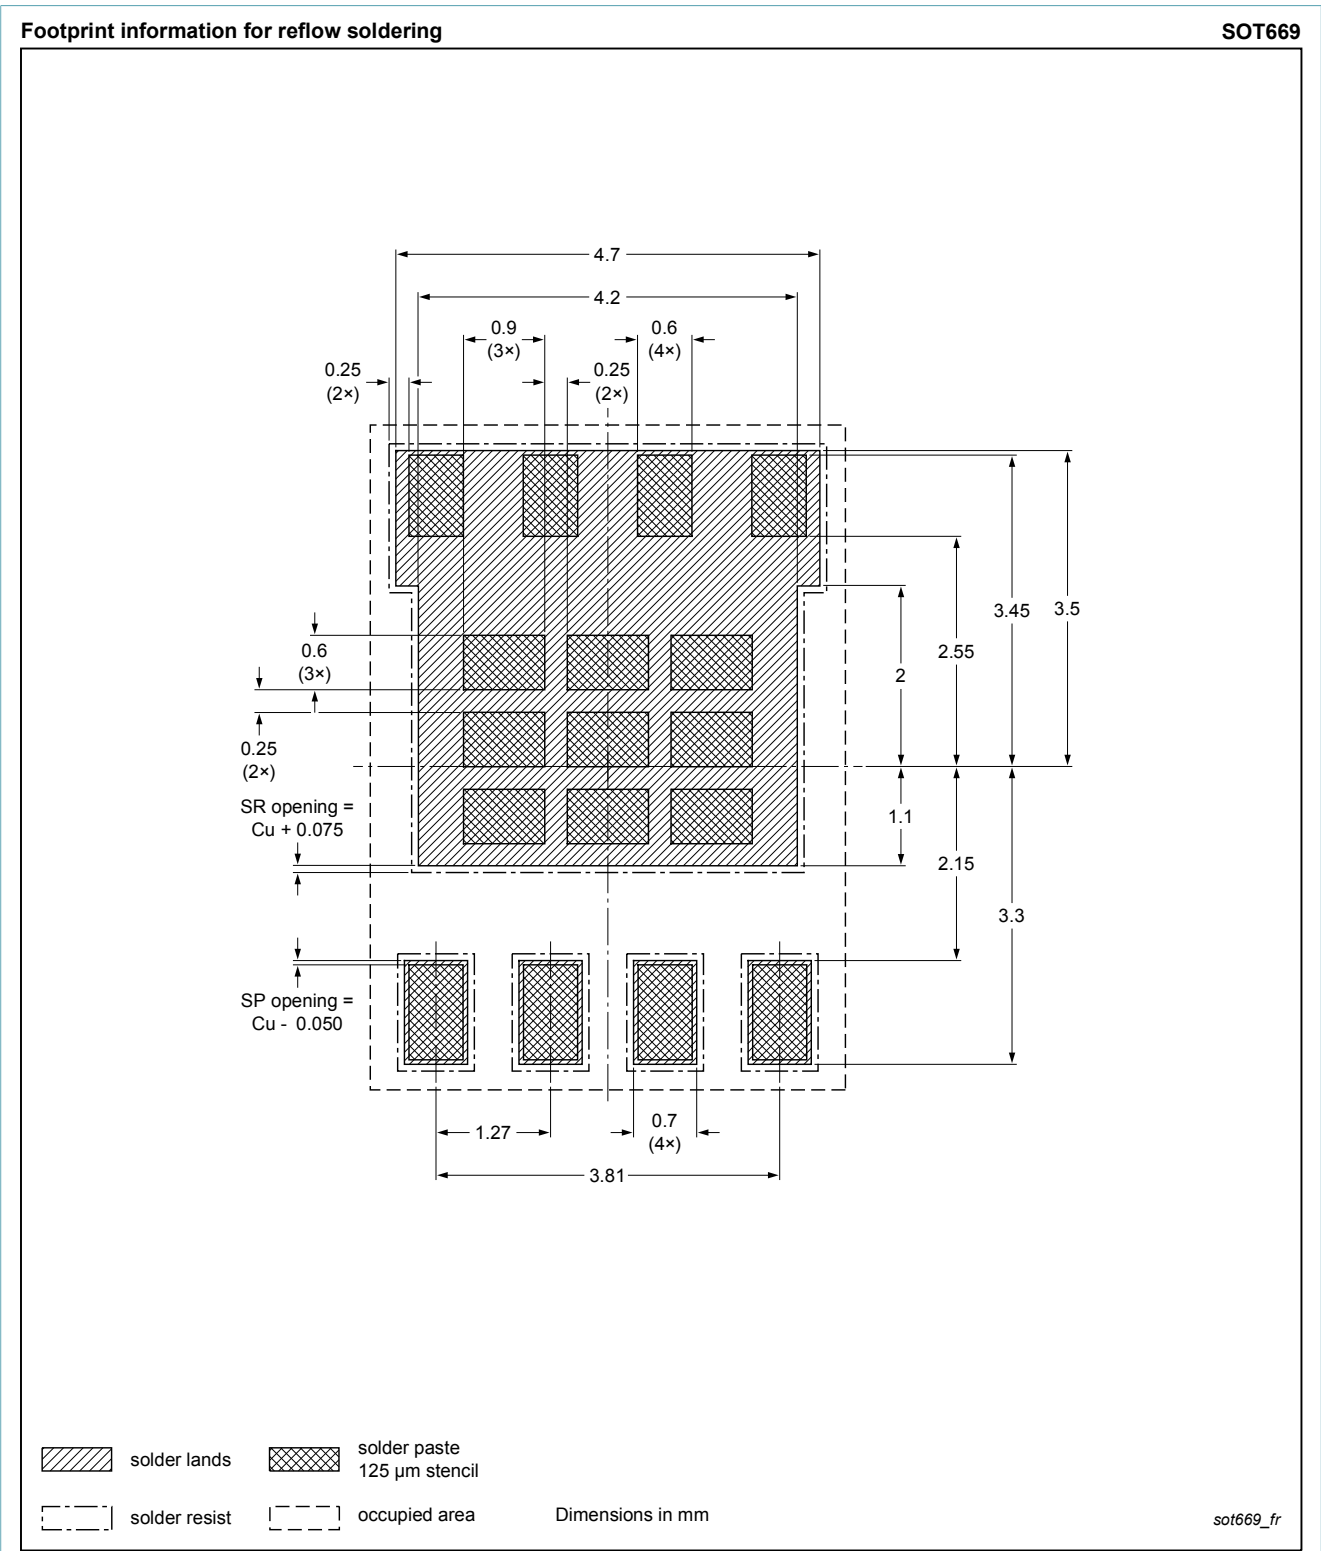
Reflow soldering footprint for LFPAK56; Power-SO8 (SOT669)
